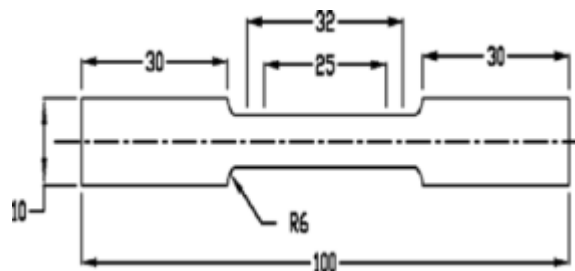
dimension of tensile test specimen as per the ASTM E8 standard
